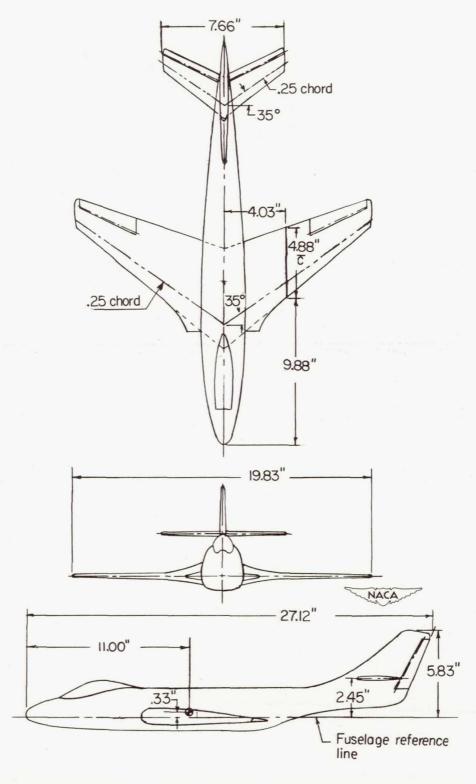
Three-view drawing of model A without chord-extensions installed.
